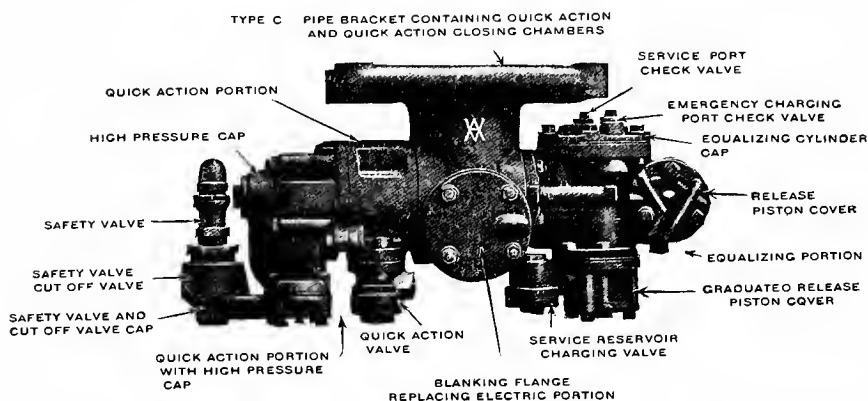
UNIVERSAL VALVE, UC EQUIPMENT, FACE VIEW, WITHOUT ELECTRIC MAGNET PORTION
